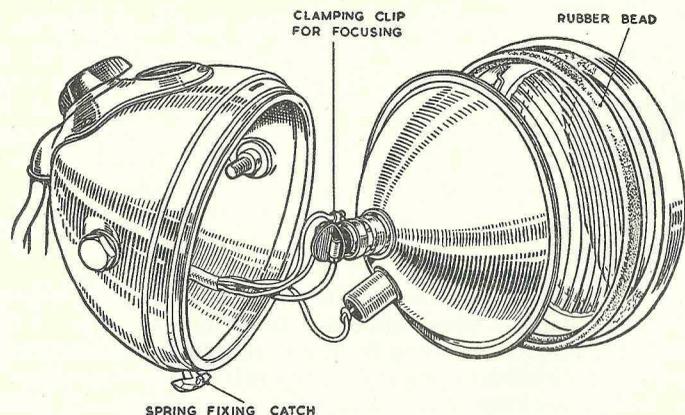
"MU" Headlamp with Front and Reflector removed.
